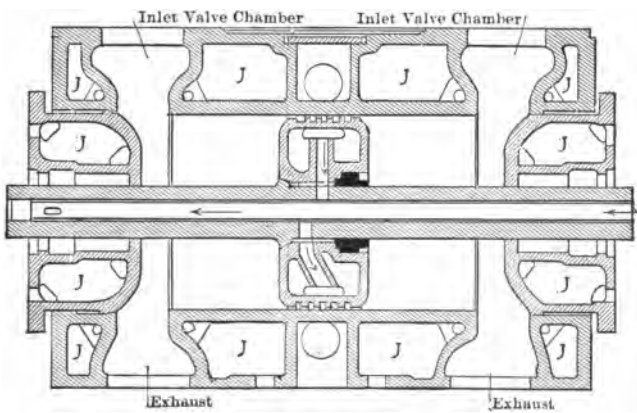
CYLINDER AND PISTON OF A DOUBLE-ACTING ENGINE.
